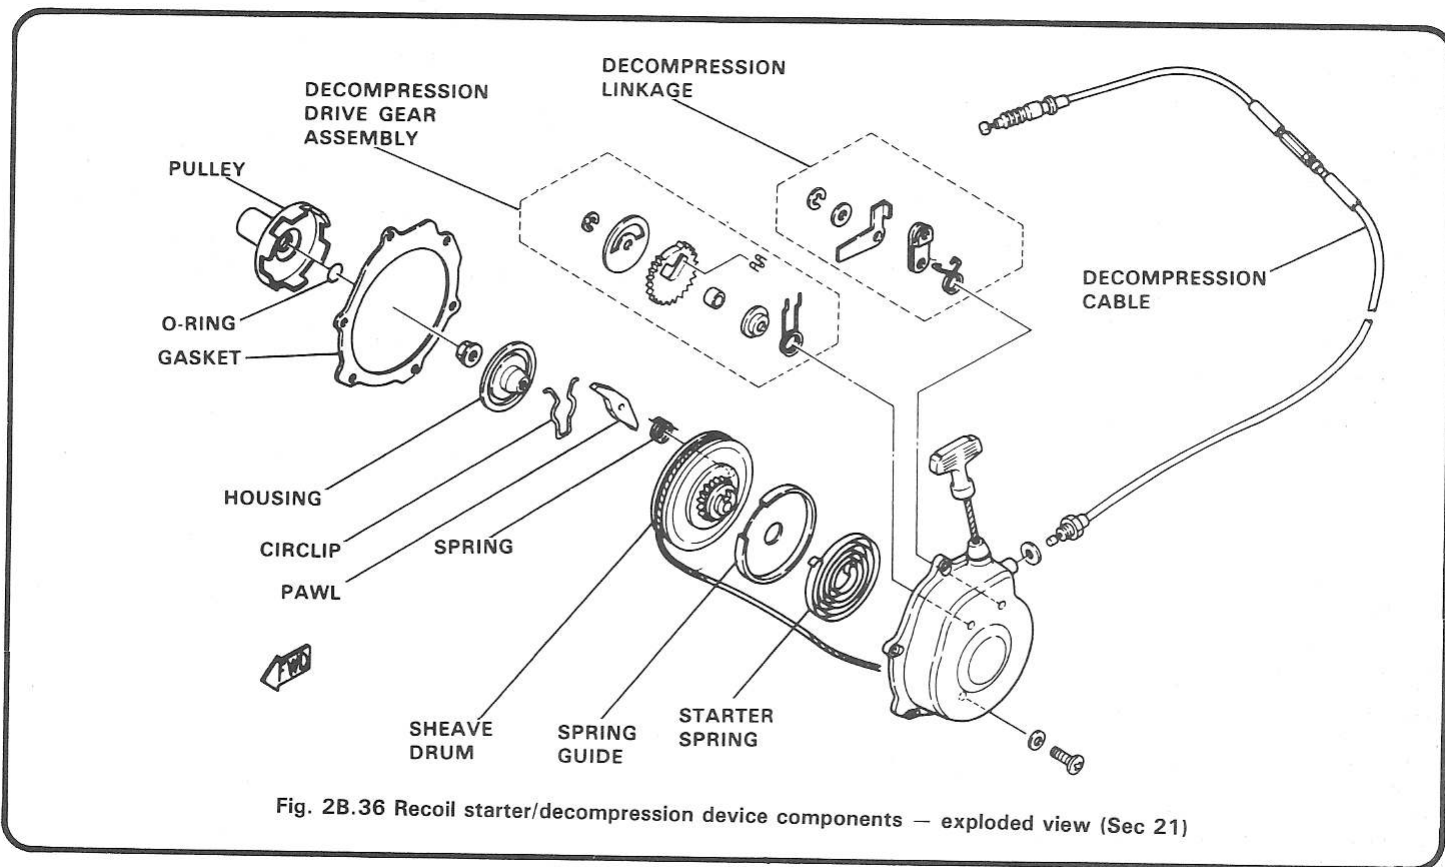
B.36 Recoil starter/decompression device components — exploded view (Sec 21)
